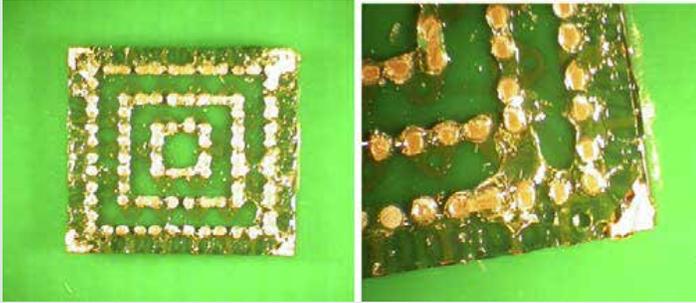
Bottom view of a BGA assembled with EF-A after being pried off.
